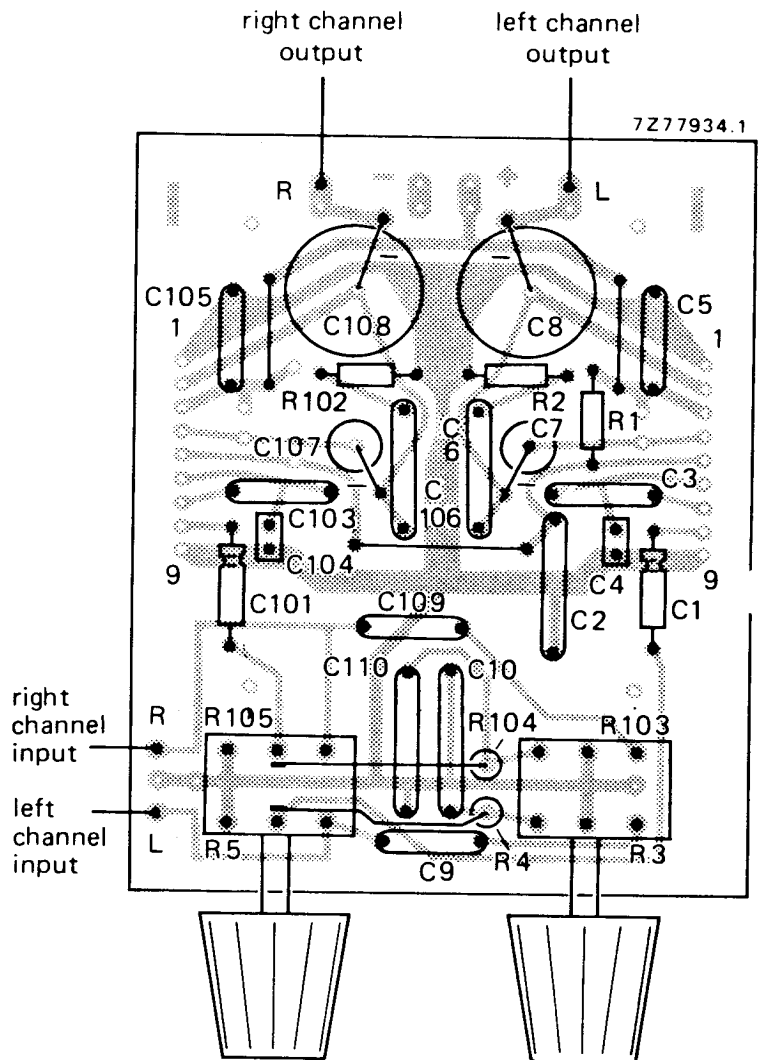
Component side of printed-circuit board showing component layout used for the circuit of Fig. 12. Balance control is not on the p.c. board.
